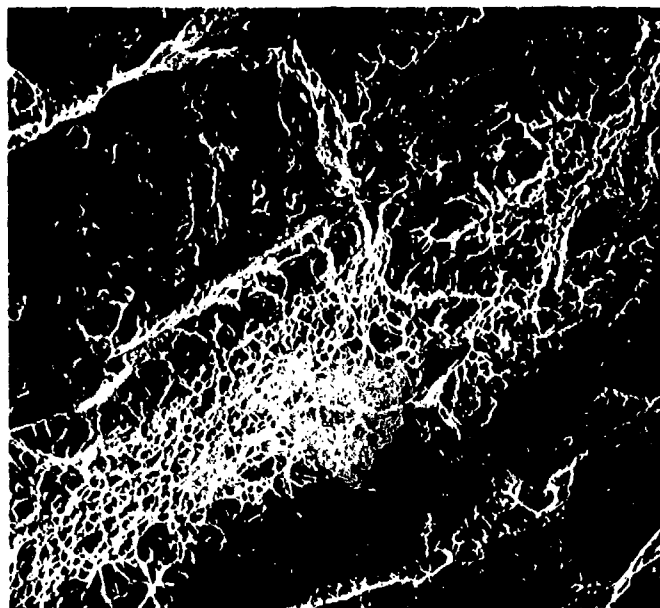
Tensile overload region of the fracture surface of A-514 weldment, 675x.
